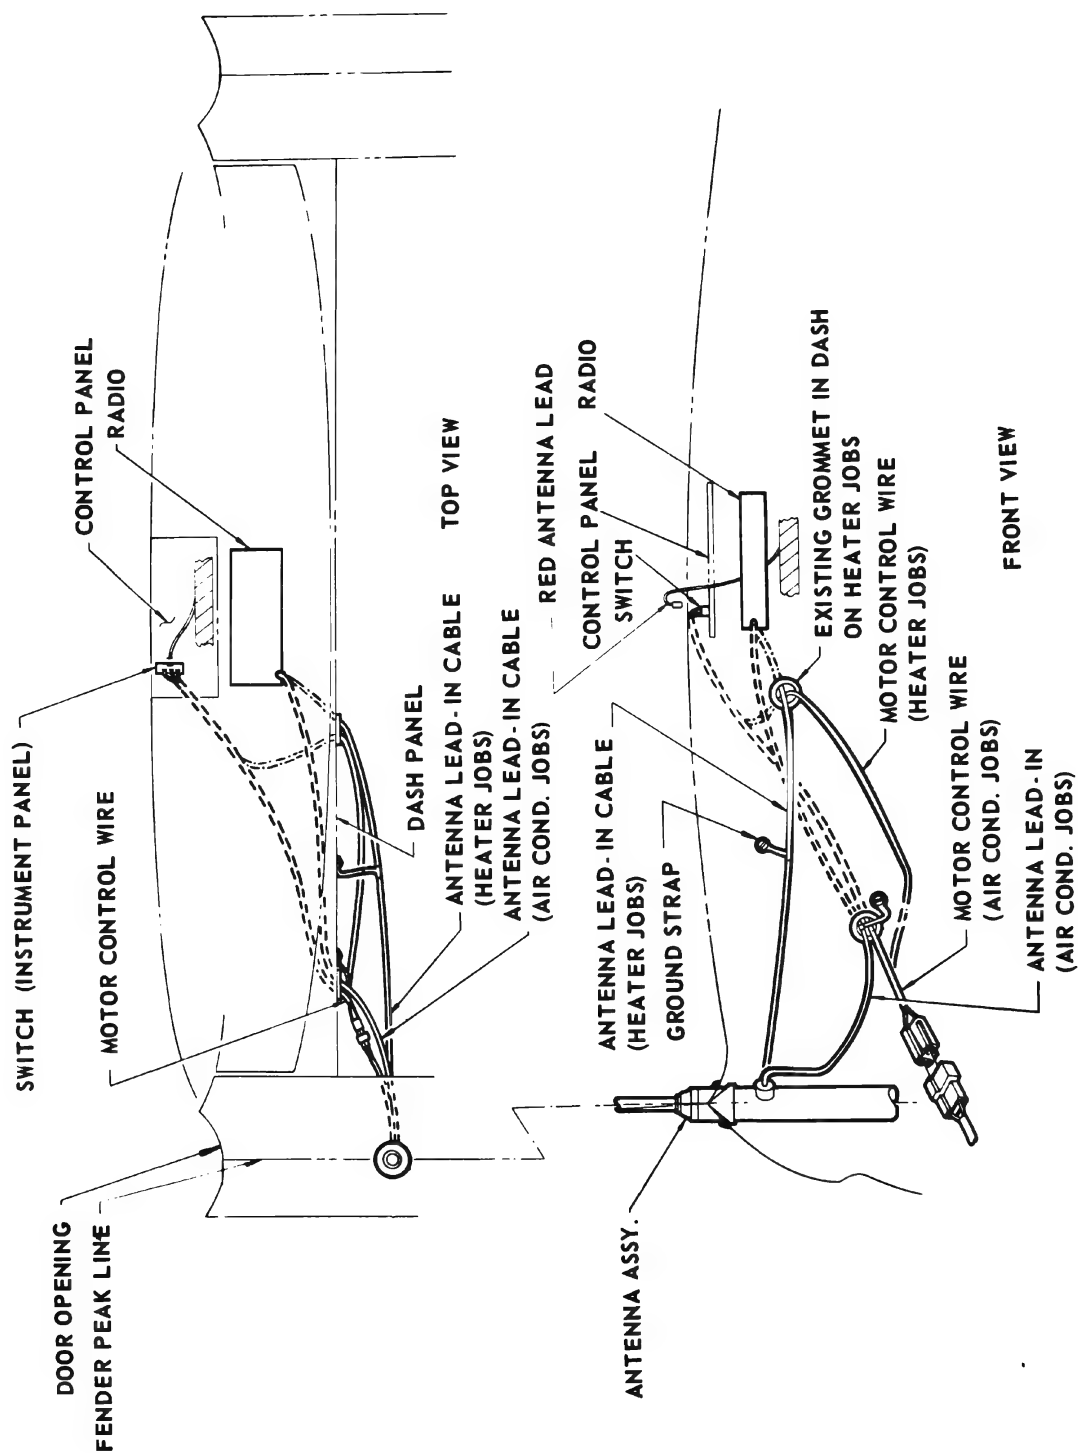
Antenna Lead-In Wire and Motor Control Wire - 4400, 4600 and 4800 Series
